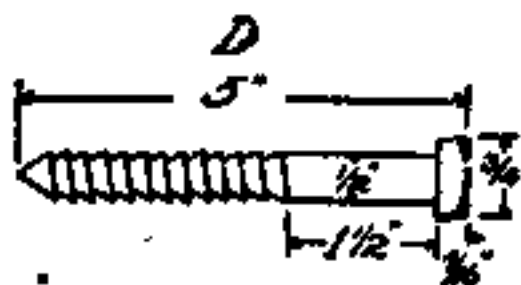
DRIVE SCREW OR LAG BOLT.
